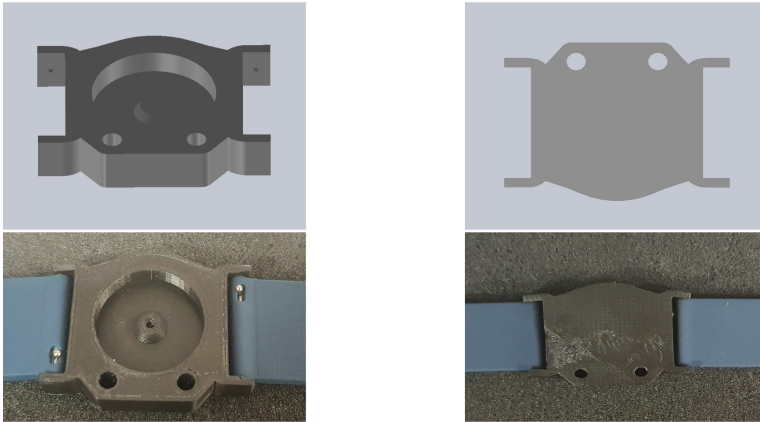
3D-printed load cell presser and wrist band assembled: front (left) and back (right) views.
